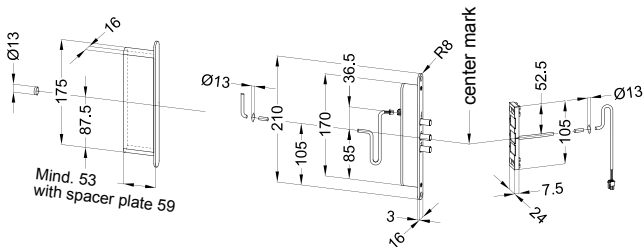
Dimensions for sash-part tappet contact with face plate F16 and frame part with spacers
